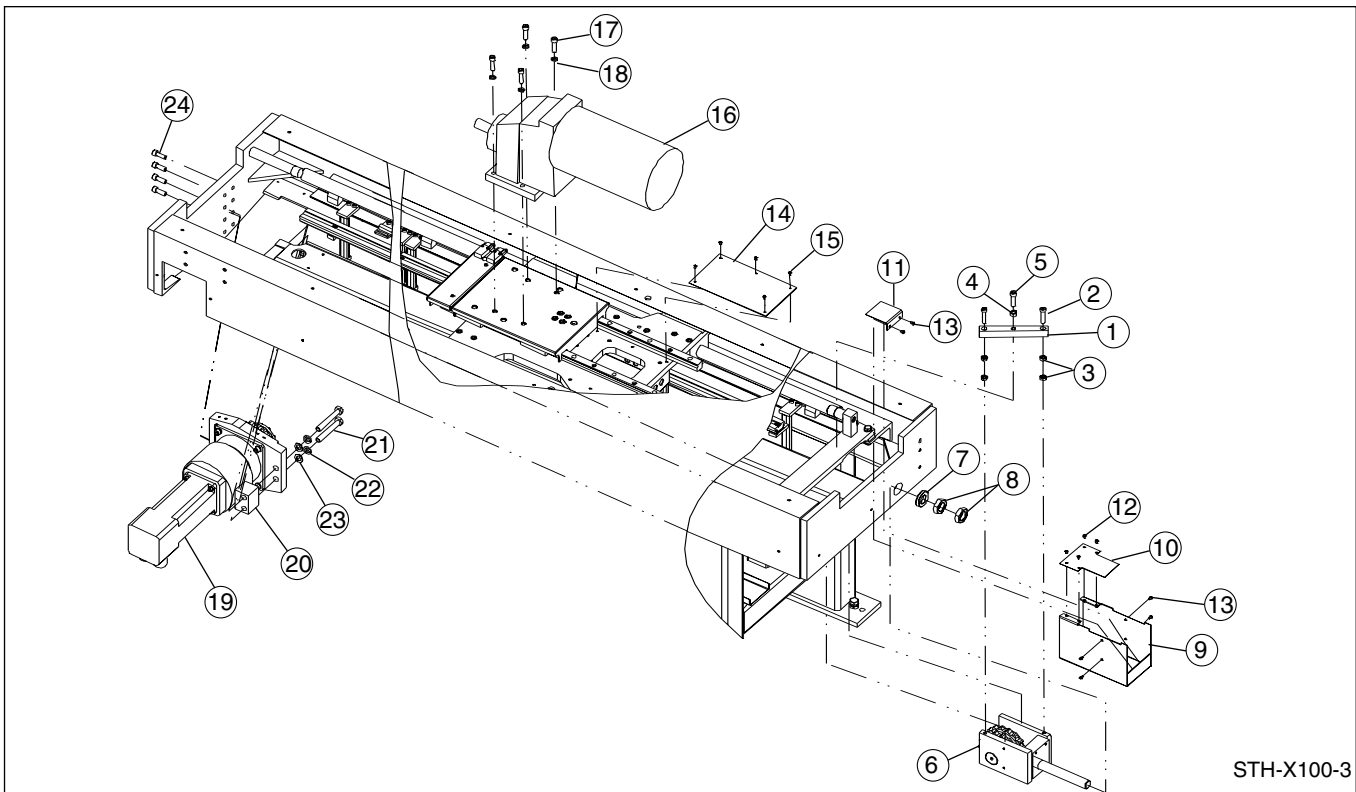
FIGURE A – TUBE HONE MACHINE BASE ASSEMBLY (3 of 8)
